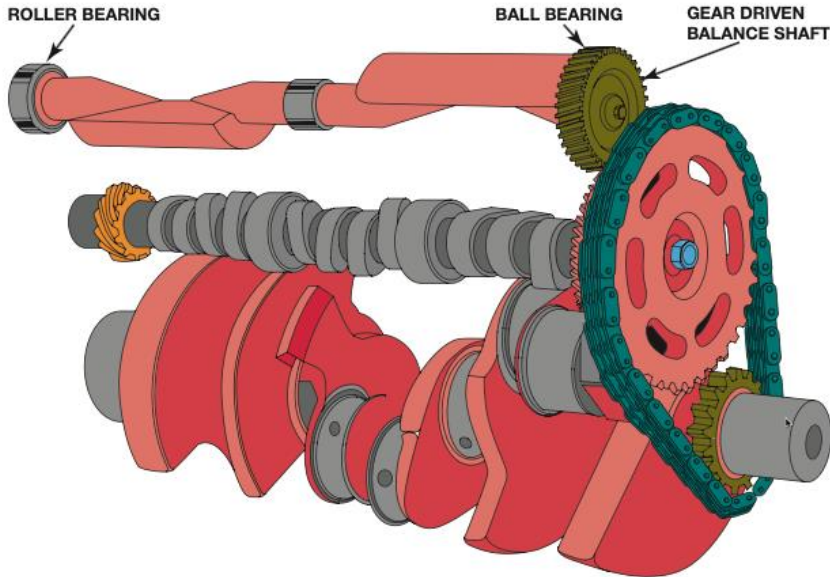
A balance shaft on a V-6 engine must be timed to the crankshaft.
